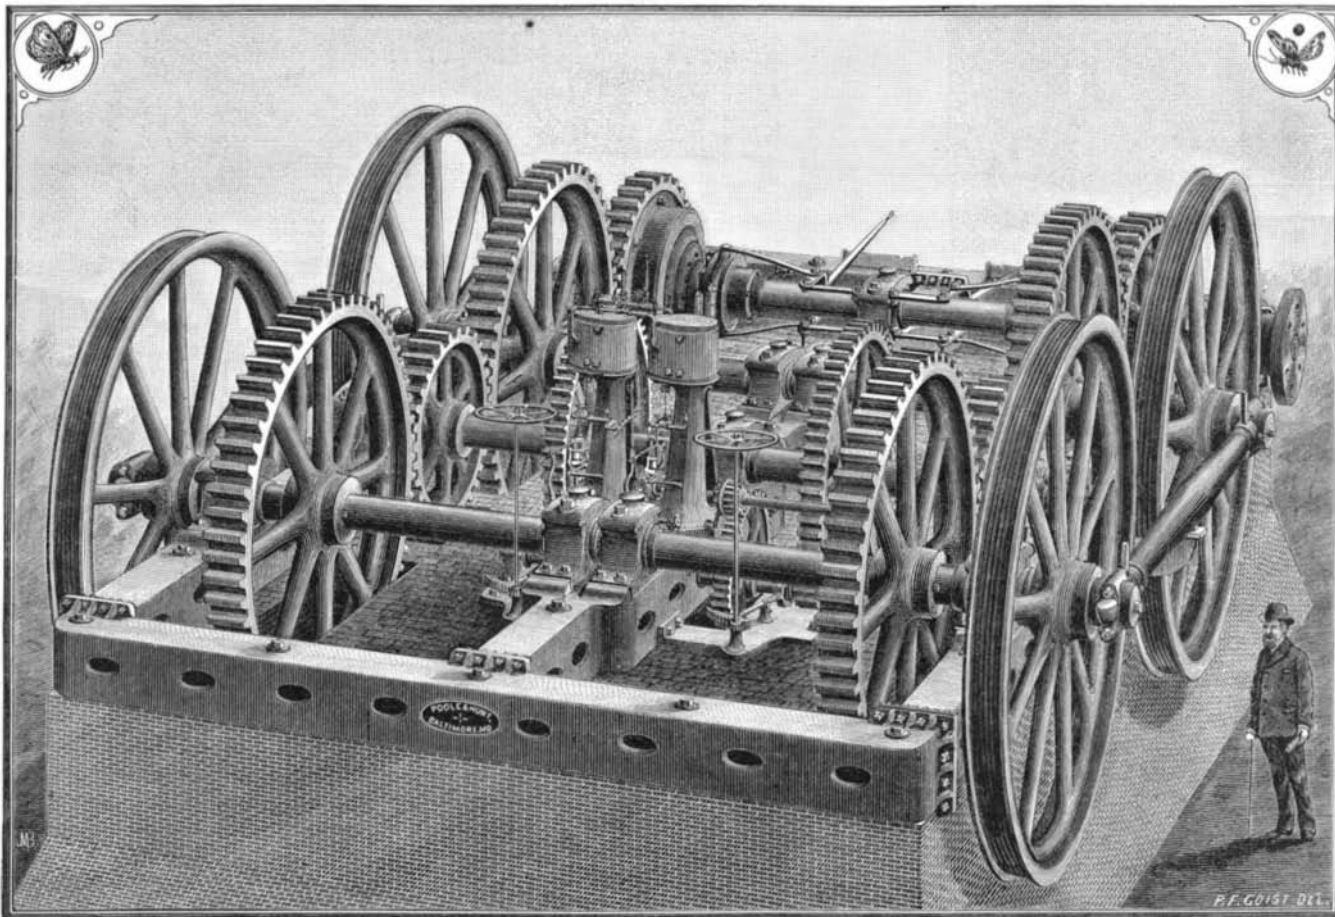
NEW YORK CITY CABLE RAILWAY.—ENLARGED VIEW OF ONE SECTION.
